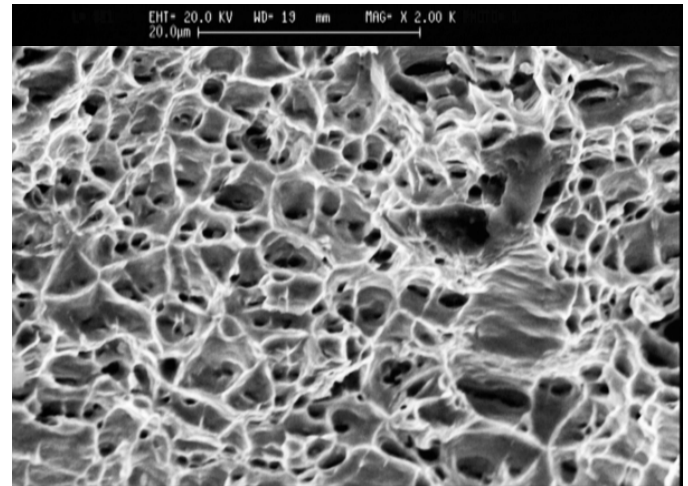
The fracture surface in the HAZ of AISI 430 stainless steel
